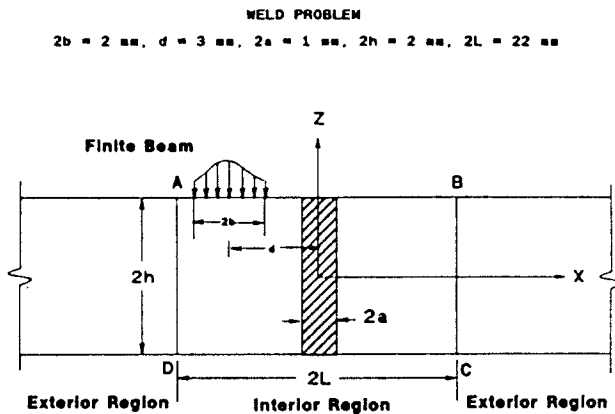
Schematic diagram of a welded plate geometry.
